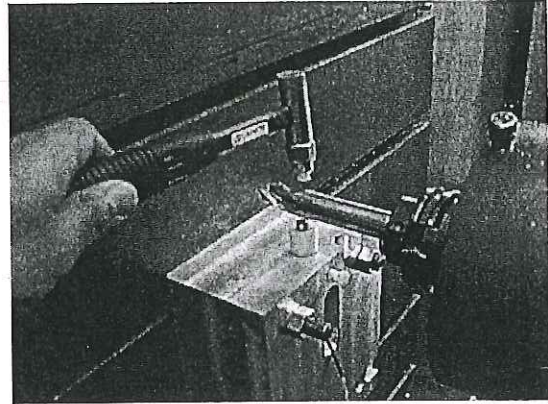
ROTATING TOOL FRF MEASUREMENT SETUP.
